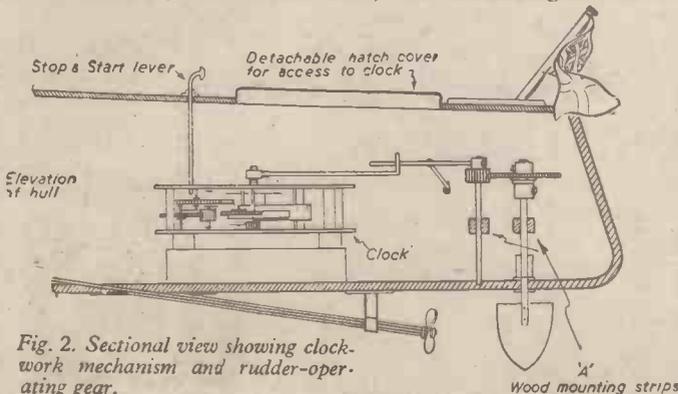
Sectional view showing clock-work mechanism and rudder-operating gear.
